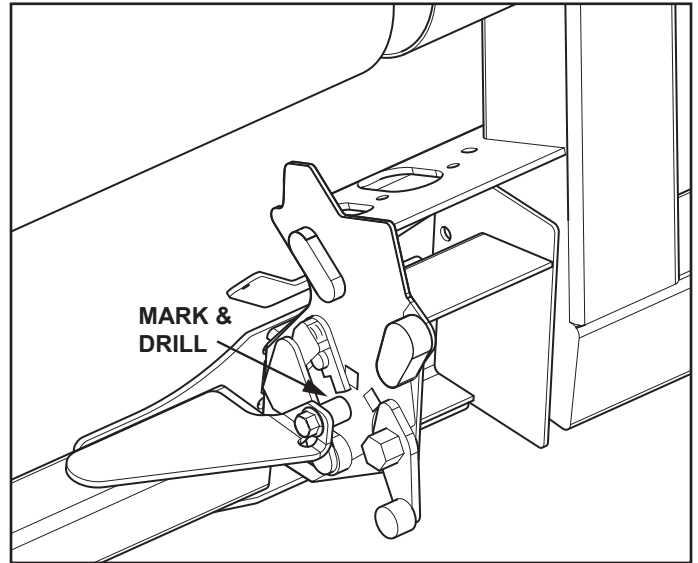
Main mount bracket location, from front right side (Portions of header and Belt drive/fan assembly not shown)
